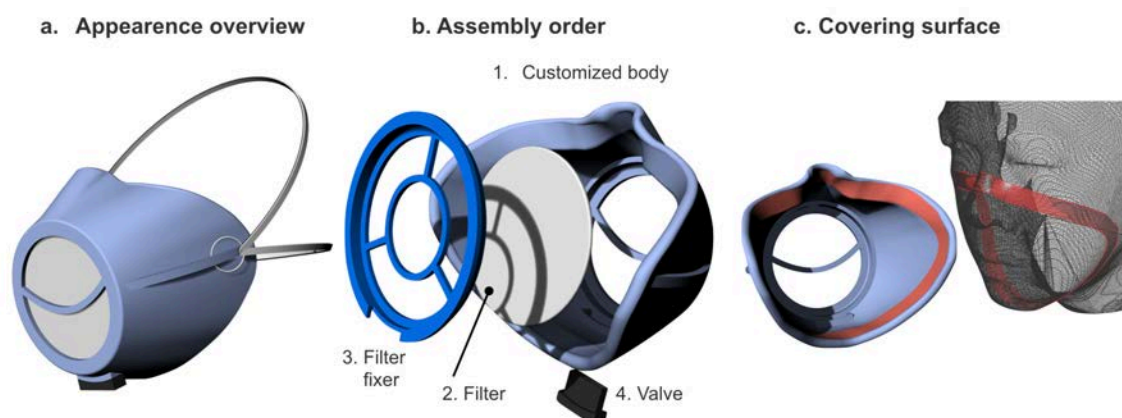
Respirator design. a. Respirator appearance b. components c. Contact area on wearer's face and inner surface of respirator .
